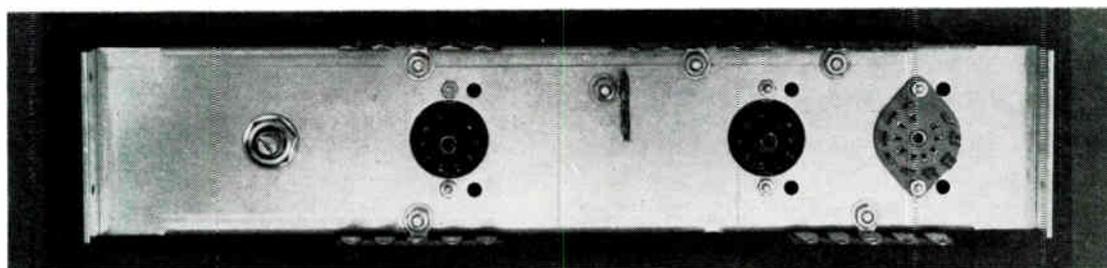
First assembly calls for mounting these parts on the chassis. This view corresponds with Pictorial B in the instruction book
